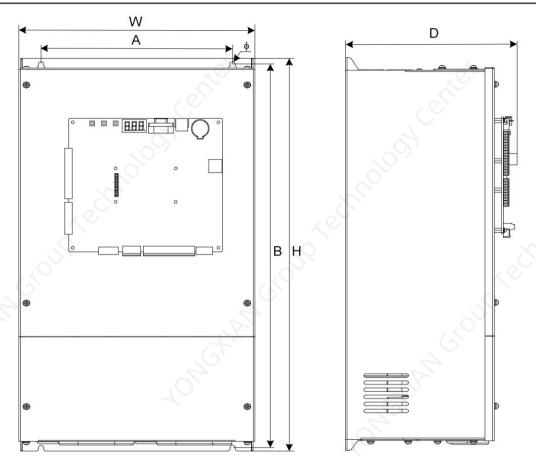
Overview and installation dimensions of the sheet metal structure 18.5-30 kW
